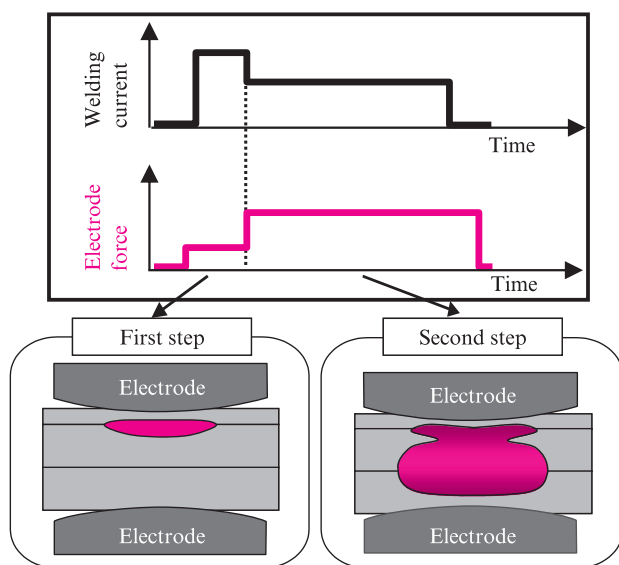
Schematic illustration of Intelligent Spot™ welding process for three-sheet-joint with higher sheet thickness ratio
